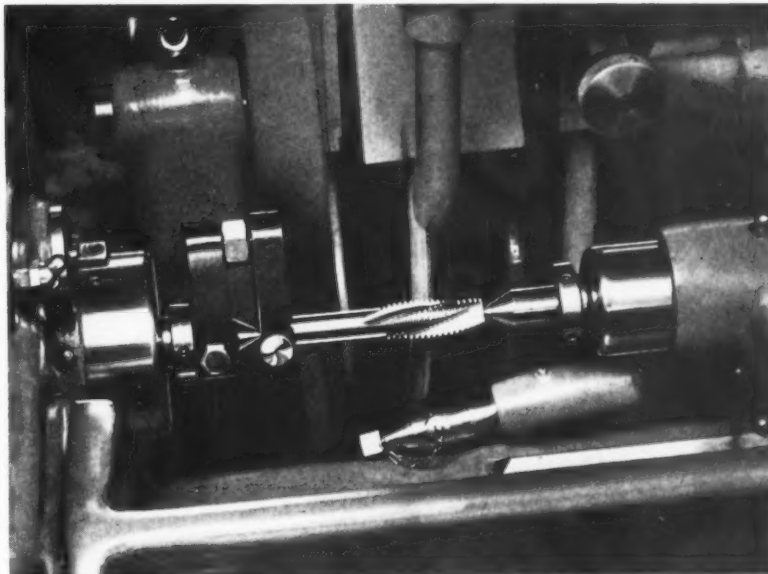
Grinding the Threads in a Tap with a Single-point or Single-edge Grinding Wheel
